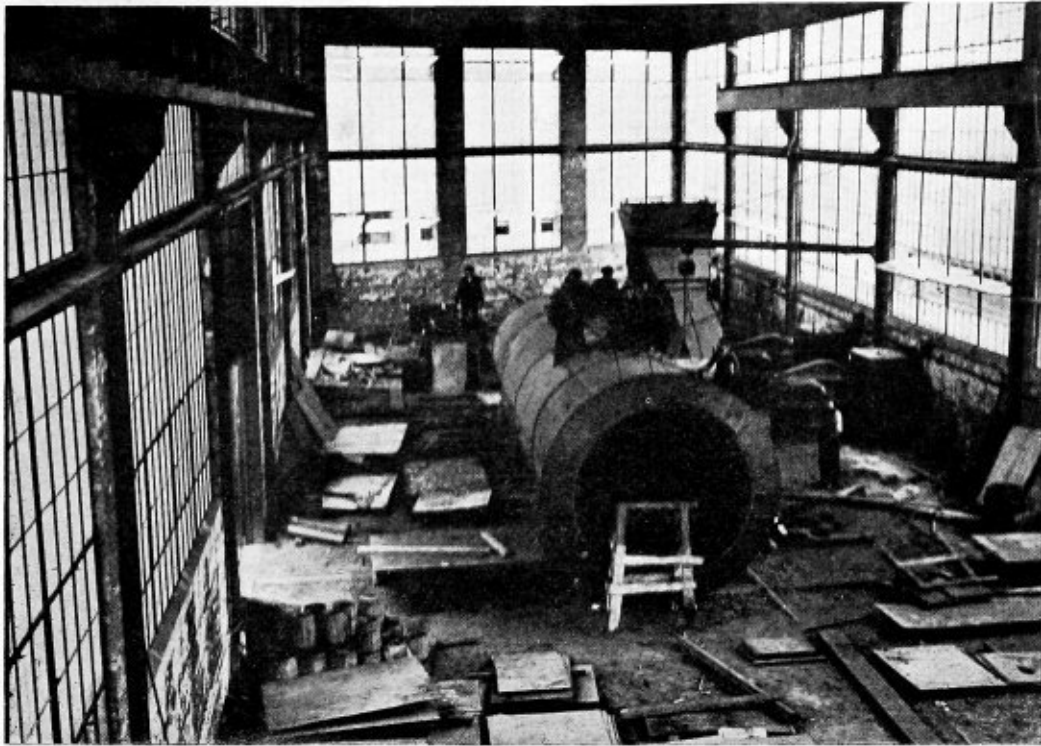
Auxiliary Boiler Shop, Used for Tank and Stack Work
